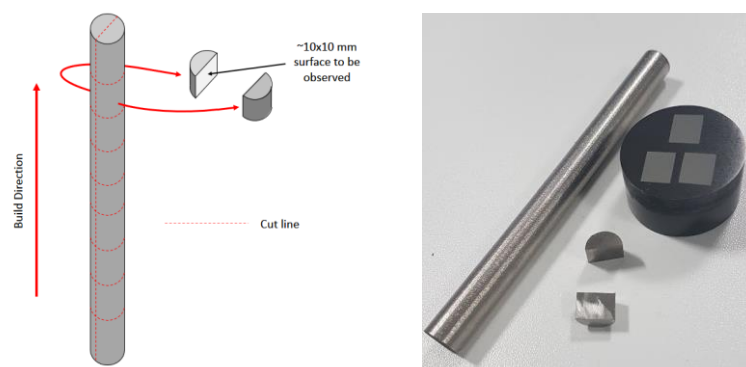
(Left) Schematic illustration showing coupons being cut from a cylindrical specimen to expose the desired face. (Right) Image of cylindrical specimen, cut coupons and full polished sample holder.
